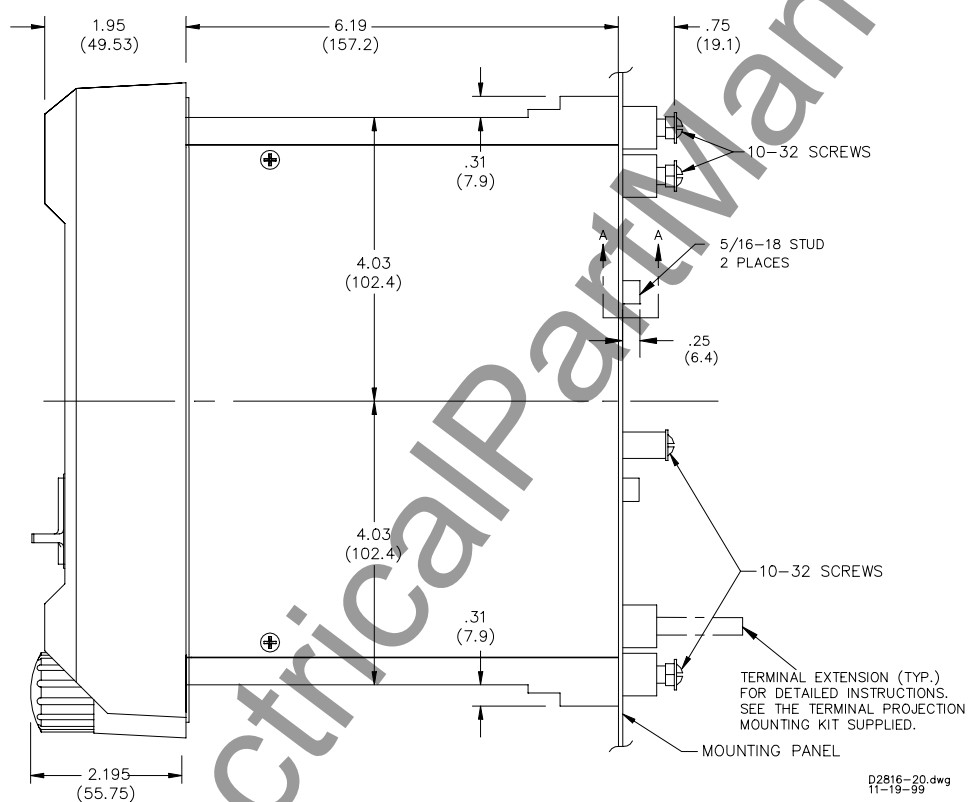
S1 Case, Double-Ended, Projection Mount, Outline Dimensions, Side View
